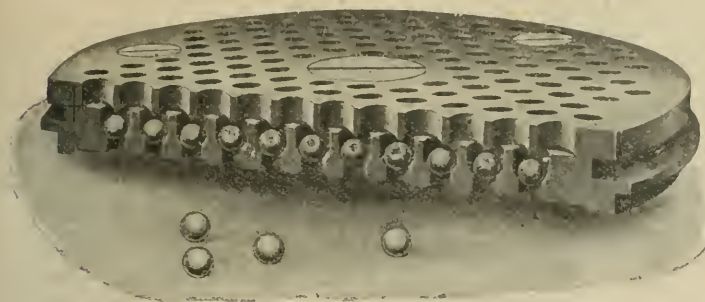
BALL VALVE FOR SCOTT PATENT AIR COMPRESSOR.
